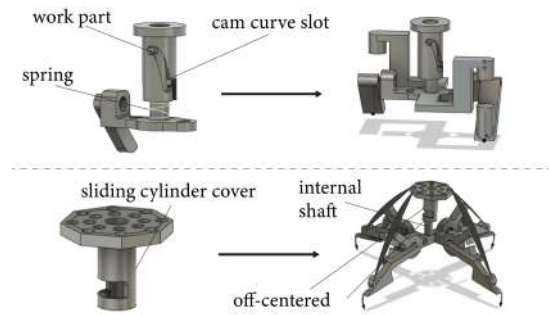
Force activated latching mechanism designs that were considered: a) click pen inspired cam mechanism b) off-centered shaft cover.
